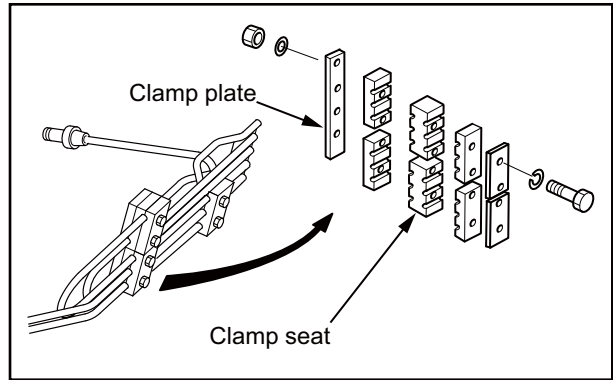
High Pressure Fuel Injection Pipe and Clamp Seat - Inspect and Replace
